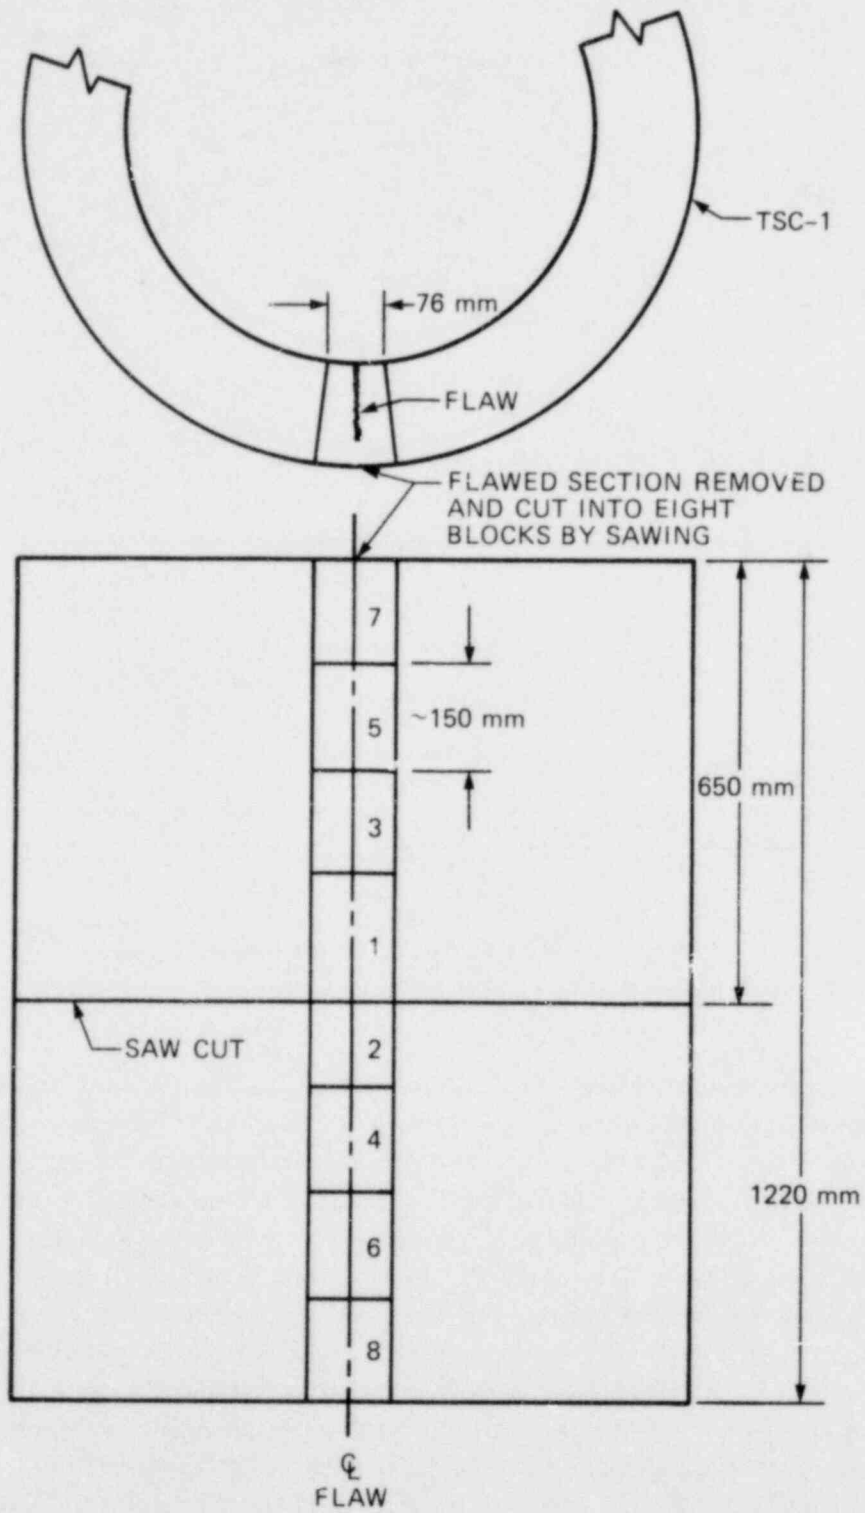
Section of TSC-1 removed for study of crack profile and fracture surfaces.
